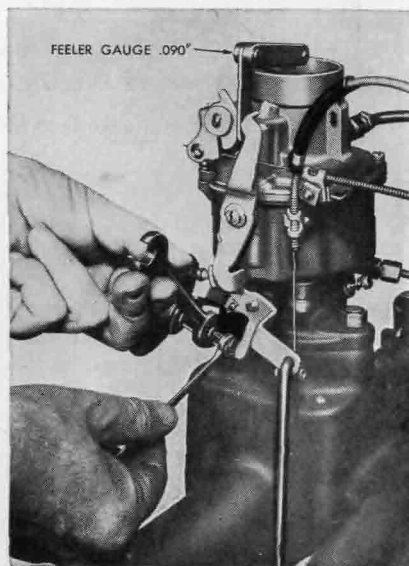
Checking and adjusting throttle-return check. (Chevrolet Motor Division of General Motors Corporation)
